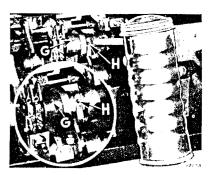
Oil Hole for Arm Shaft Oil Reservoir
